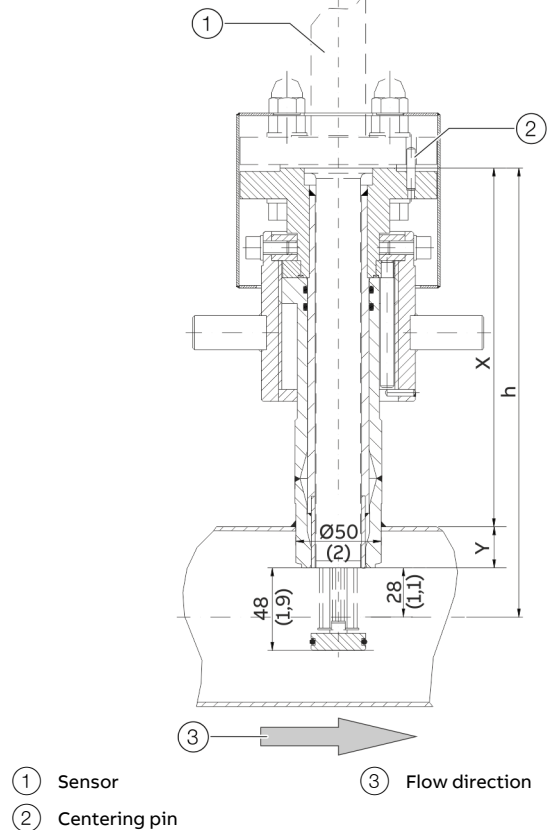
Integrated hot tap fitting in measurement position, dimensions in mm (in)
